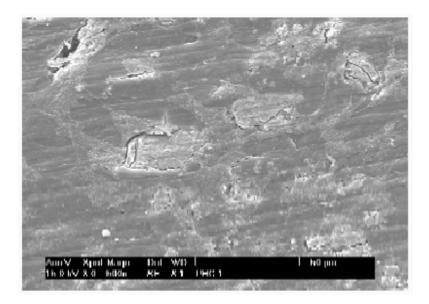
Surfaces produced on Aluminum steel after been cut by using milling machine that been scan in electron microscope.
